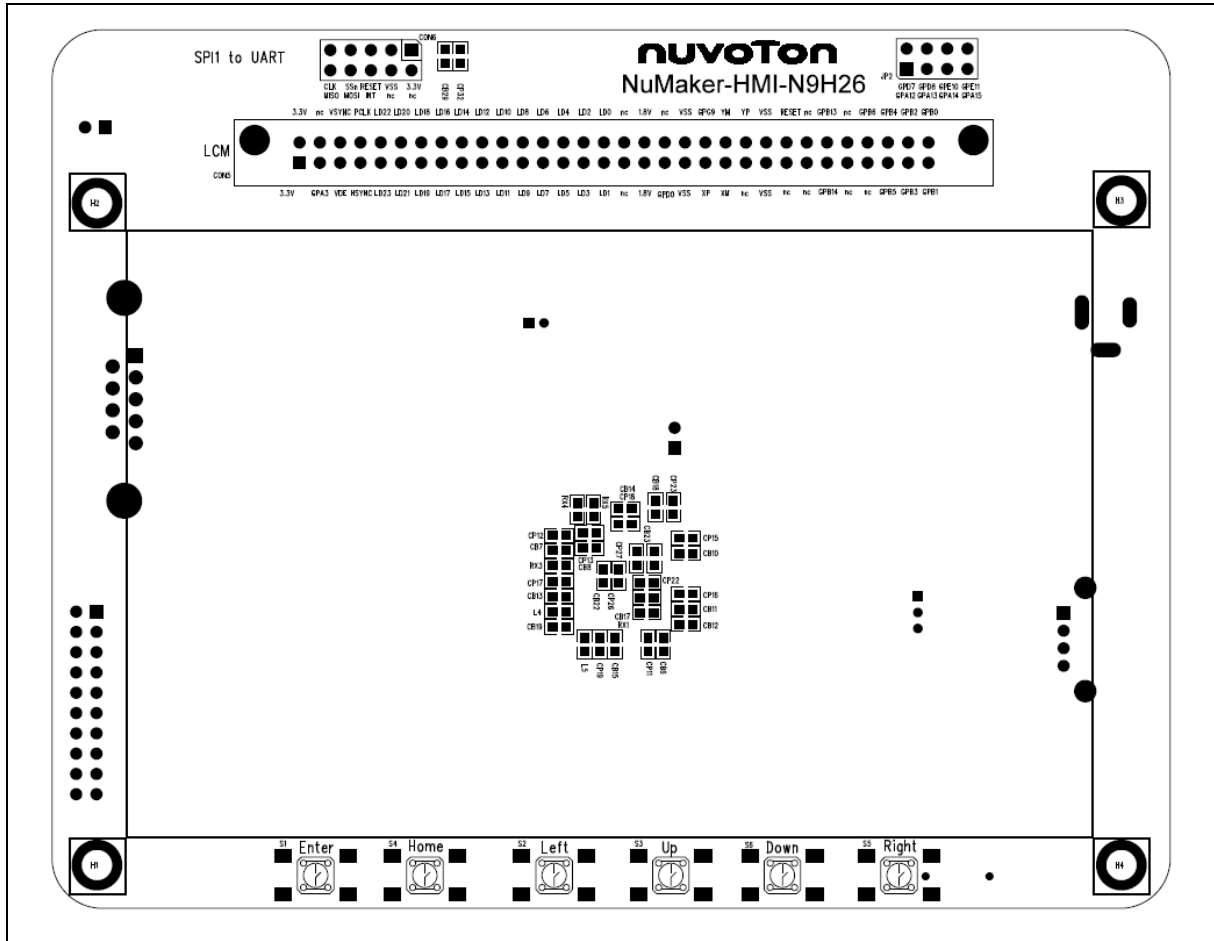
NuMaker-N9H26 PCB Placement (Front View)
